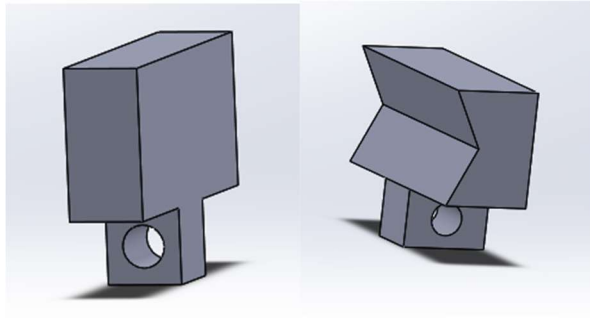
Example of jigs holding beam in the welding table, Solid Works
